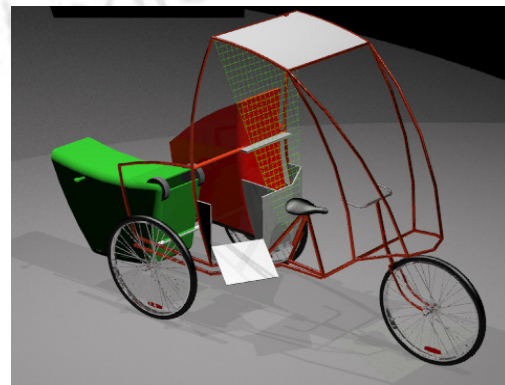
CAD model of Pariskar front 3 quarter view
